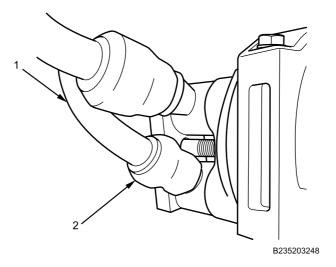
Compressor Discharge Outlet Heat Shrink Tubing
